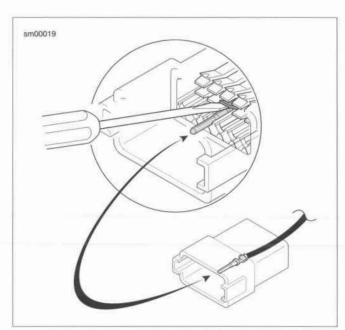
Deutsch DT Sealed Connector: Press Terminal Latch and Back Out Pin
